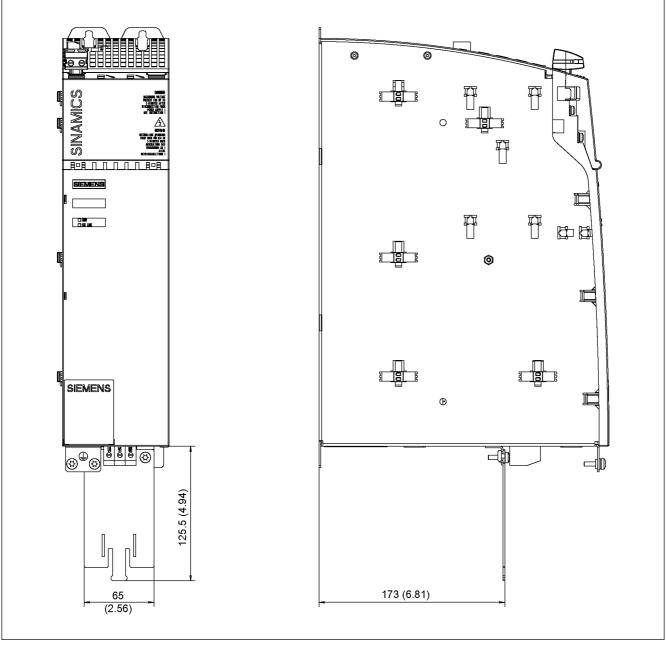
Dimension drawing of shielded terminal plate on a 100 mm module with internal air cooling
